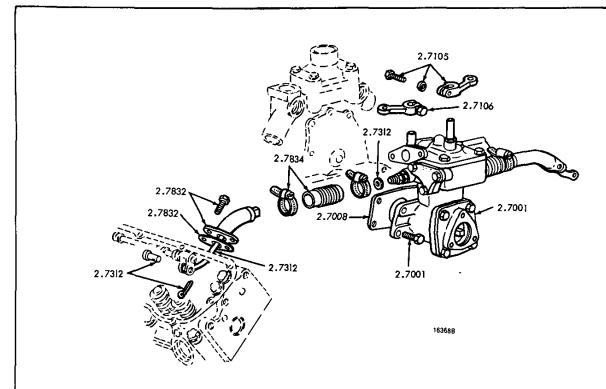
A GOVERNOR ASSEMBLY (FORMER)
